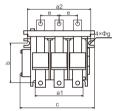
CKJ5-125-160 Appearance and Installation Dimensions
